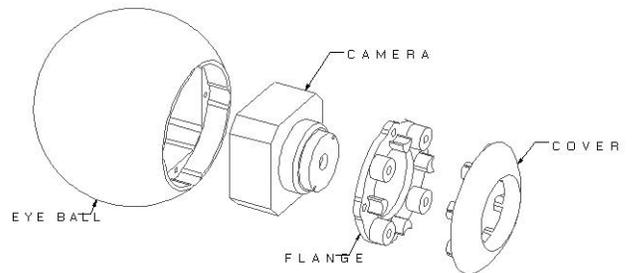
Exploded view of the eye-ball (internal camera support spring not shown)
